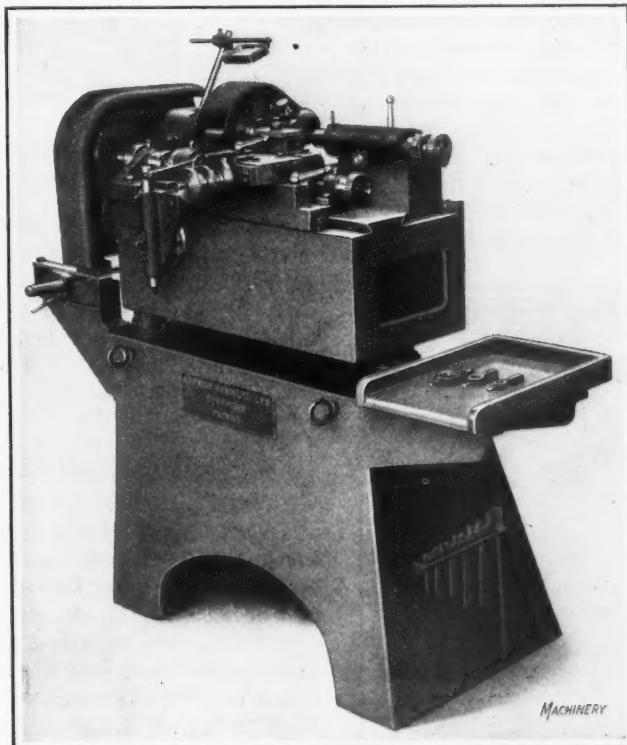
Lathe for cutting Thread Gages, which is built by Alfred Herbert, Ltd.
